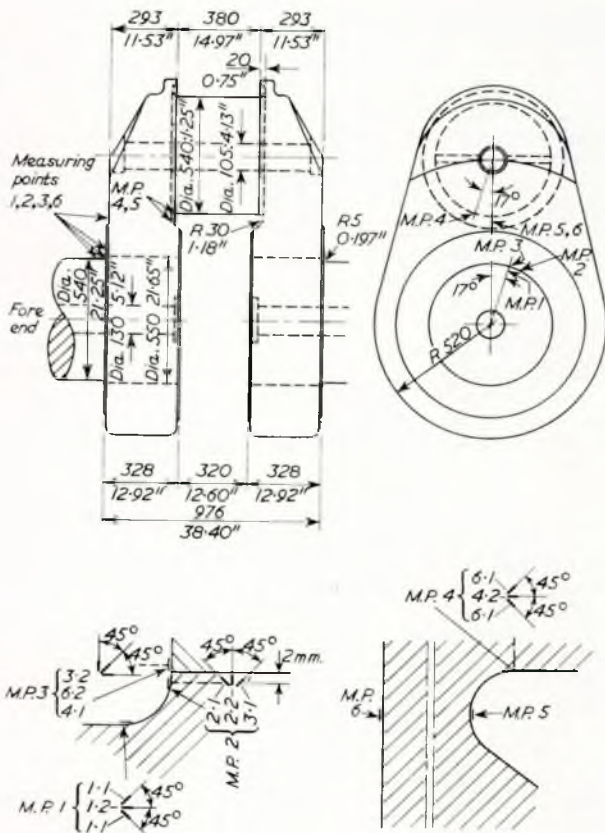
Engine DM 760/1500 VGS 7U: crank 7, crank dimensions and arrangement of gauges
